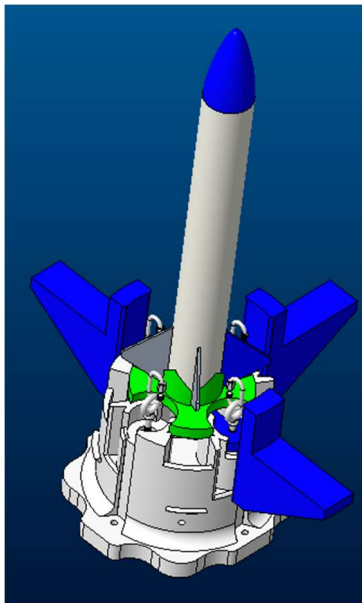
Internal view of the assembled launch mechanism with the payload.
